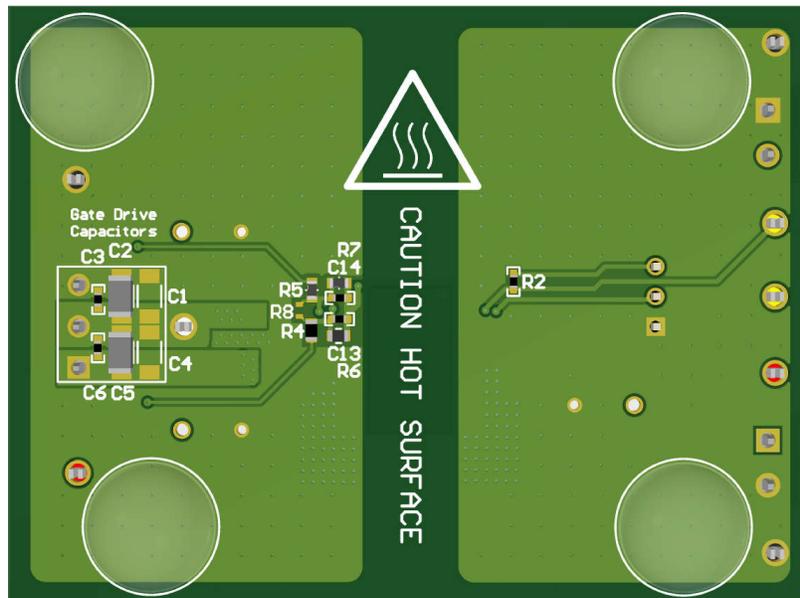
UCC14131EVM-070, Fully Assembled 3D Bottom View
